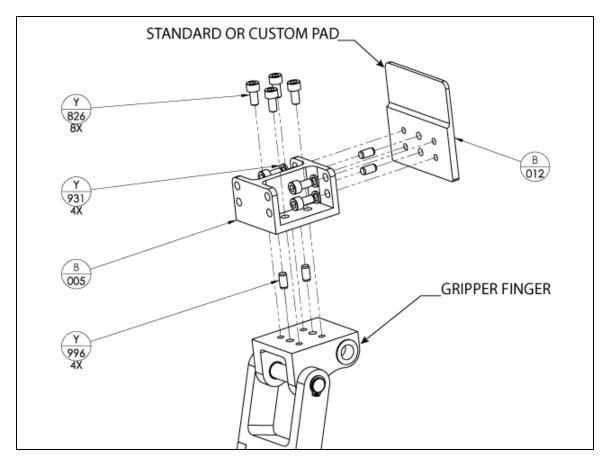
Assembly of the Finger Pad B-012 to the Pad Holder B-005 and assembly of the Pad Holder to the Robotiq 2-Finger Adaptive Robot Gripper – 200.
